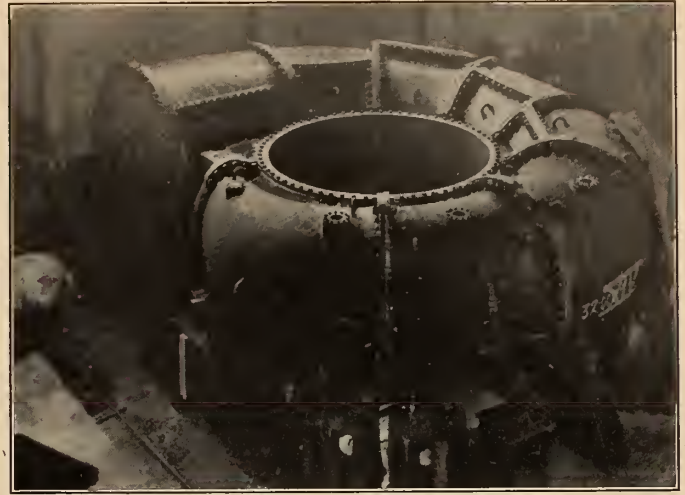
Assembled Sectional Scroll-Case Under 260-Pound Pressure Test. Three Million Pounds on Head-Cover.
